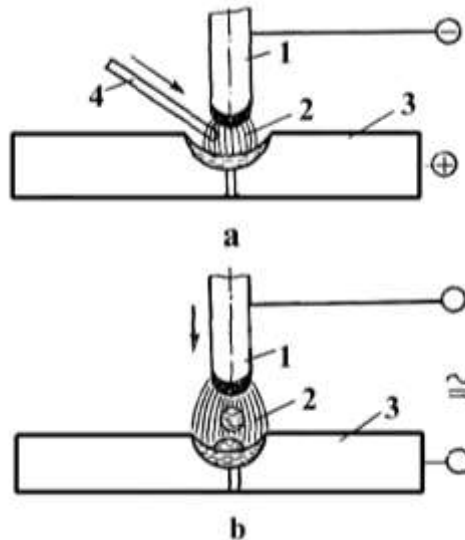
Schemes of the arc welding: a - by N.Benardos; b - by N.Slavjanov;
